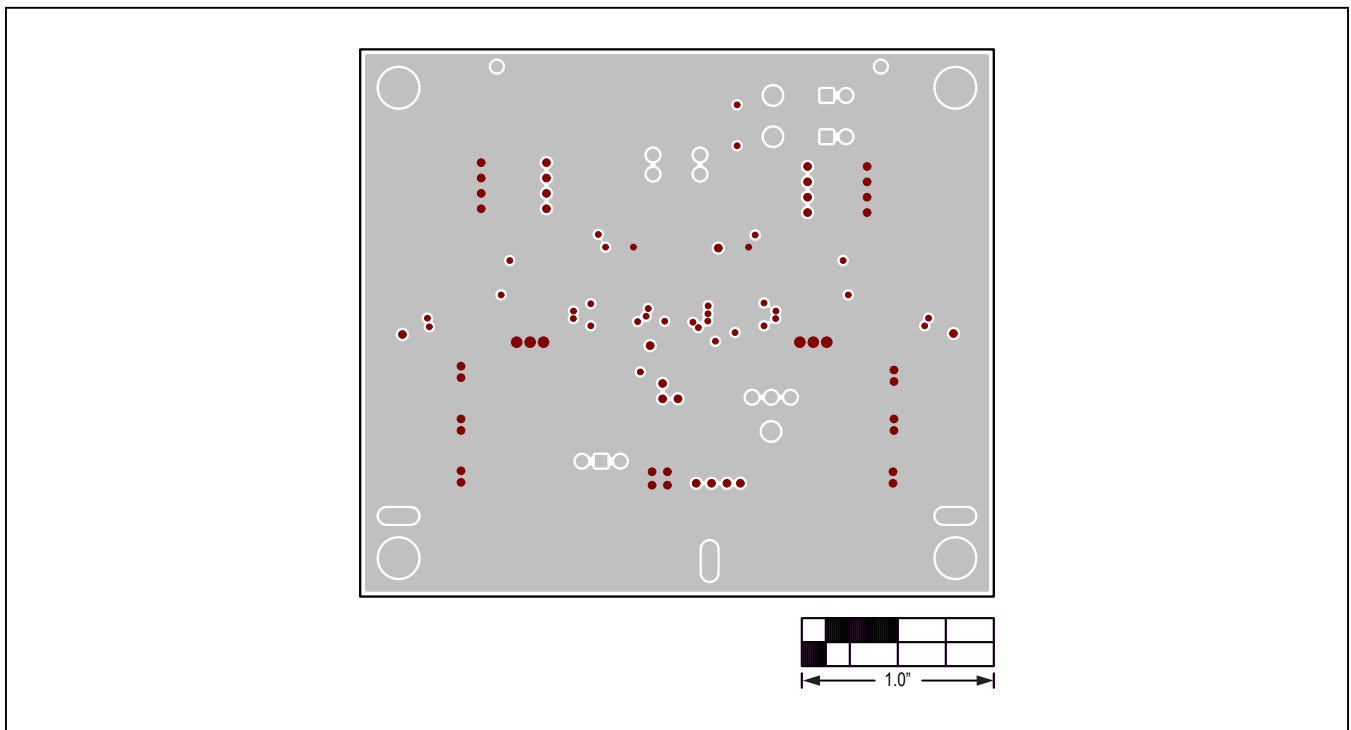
MAX16932 EV Kit PCB Layout—Component Side
